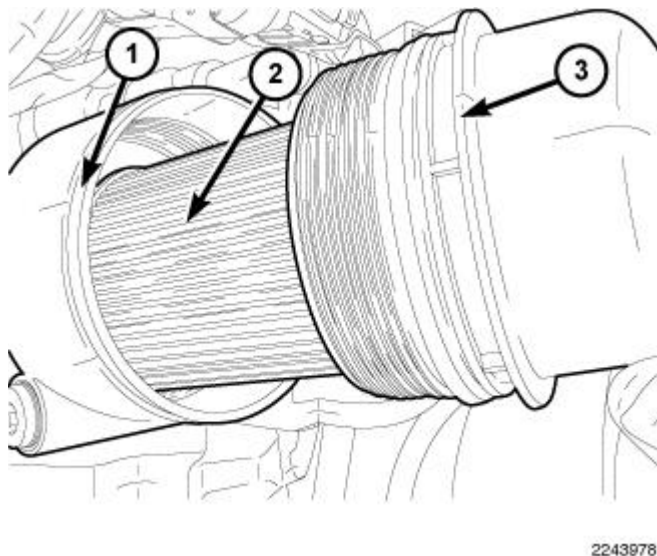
Oil Filter Seal, Oil Filter & Housing Adapter Cap
